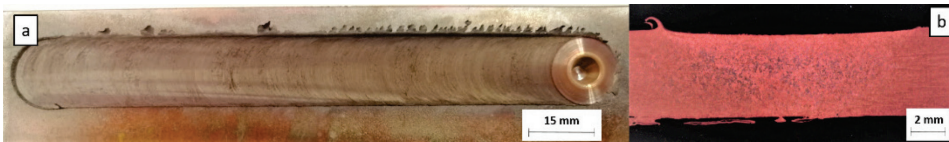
Image of the visually macroscopic defect-free weld of copper (a) and cross section of the same weld (b) (adapted from Publication VI).
